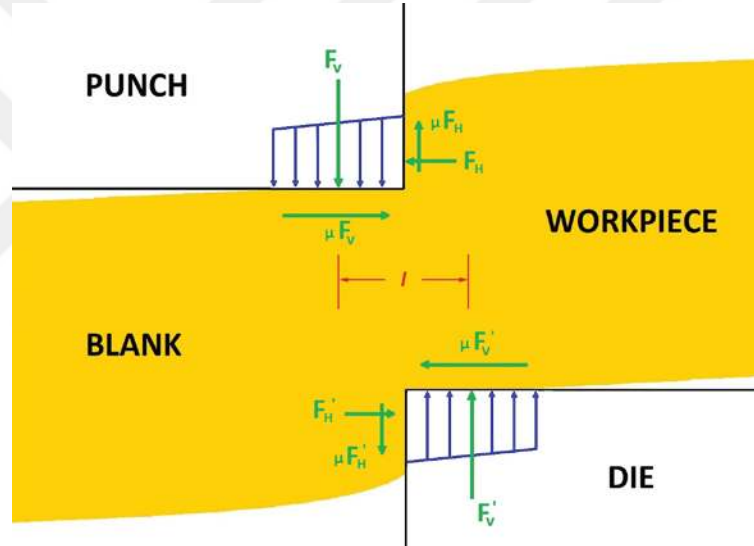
Illustration of the force components during the blanking of the workpiece
